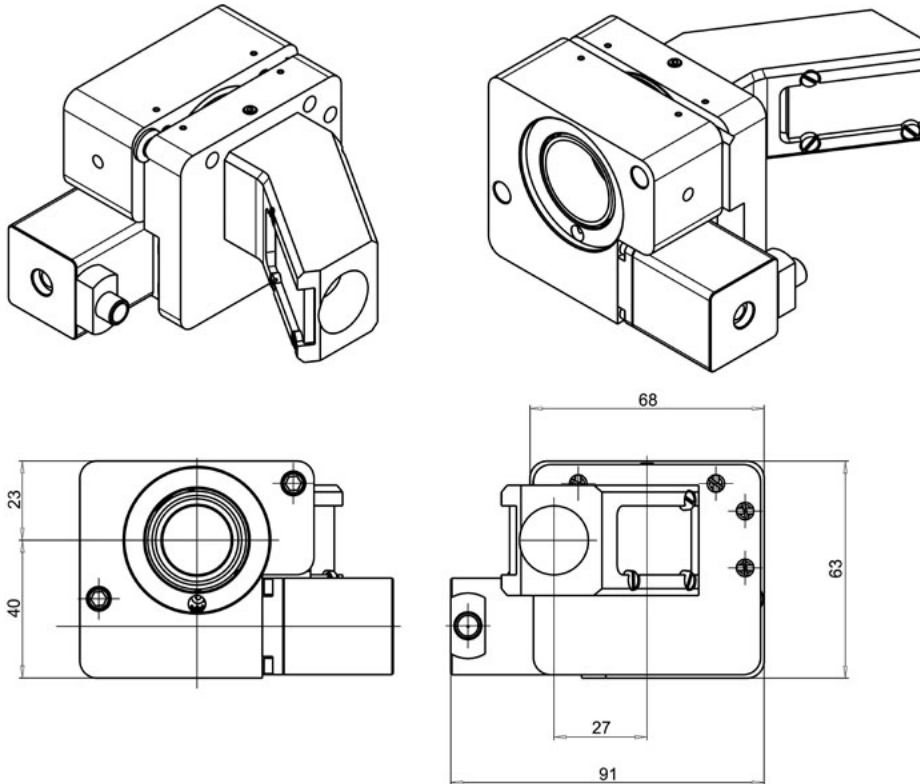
Mechanical drawings of Watt Pilot standard attenuator. All dimensions shown in millimeters.
